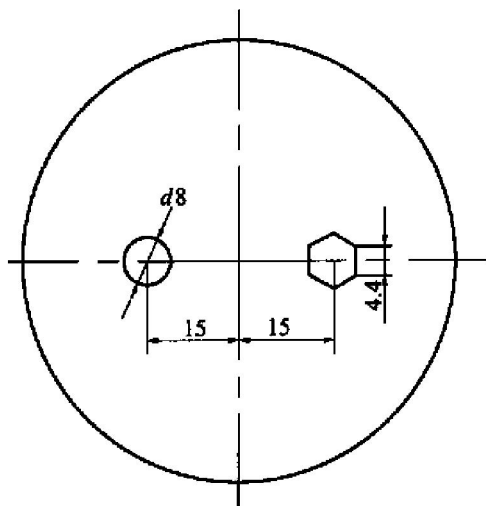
Die layout of extrusion test 3 (Unit: mm)
